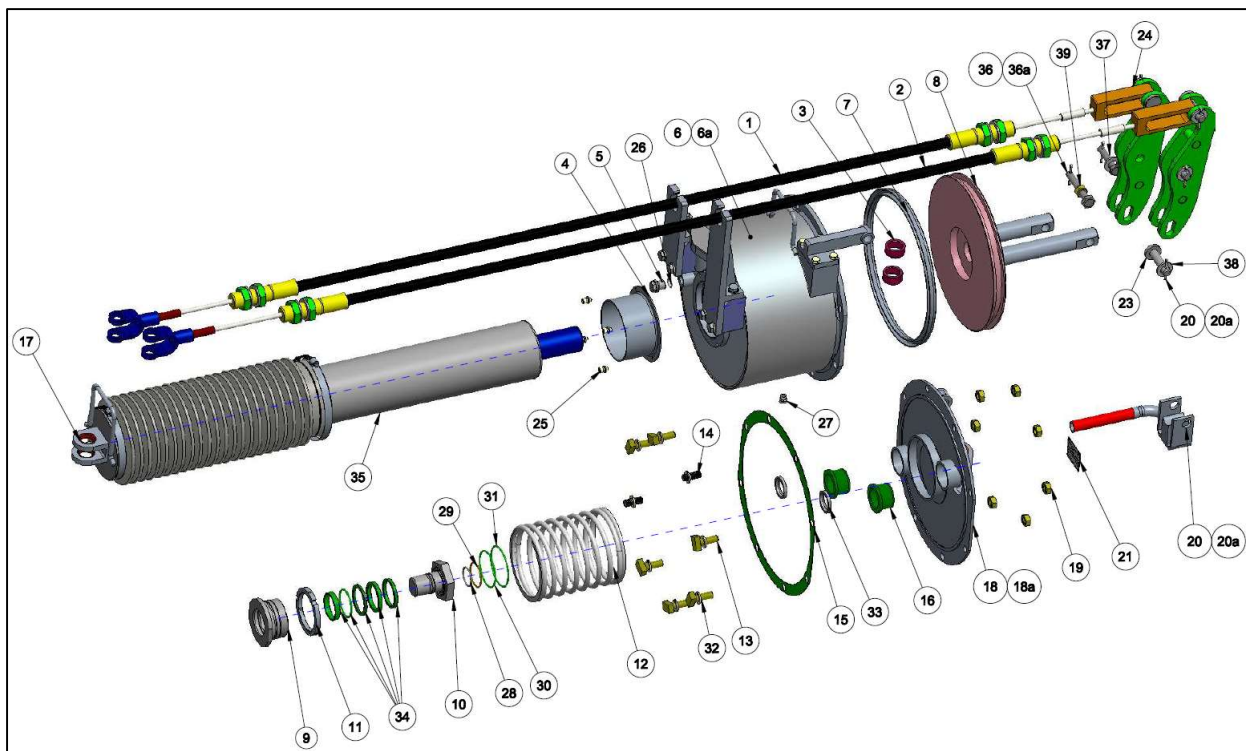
Brake Cylinder-11 Inch with Hand Brake Cable
